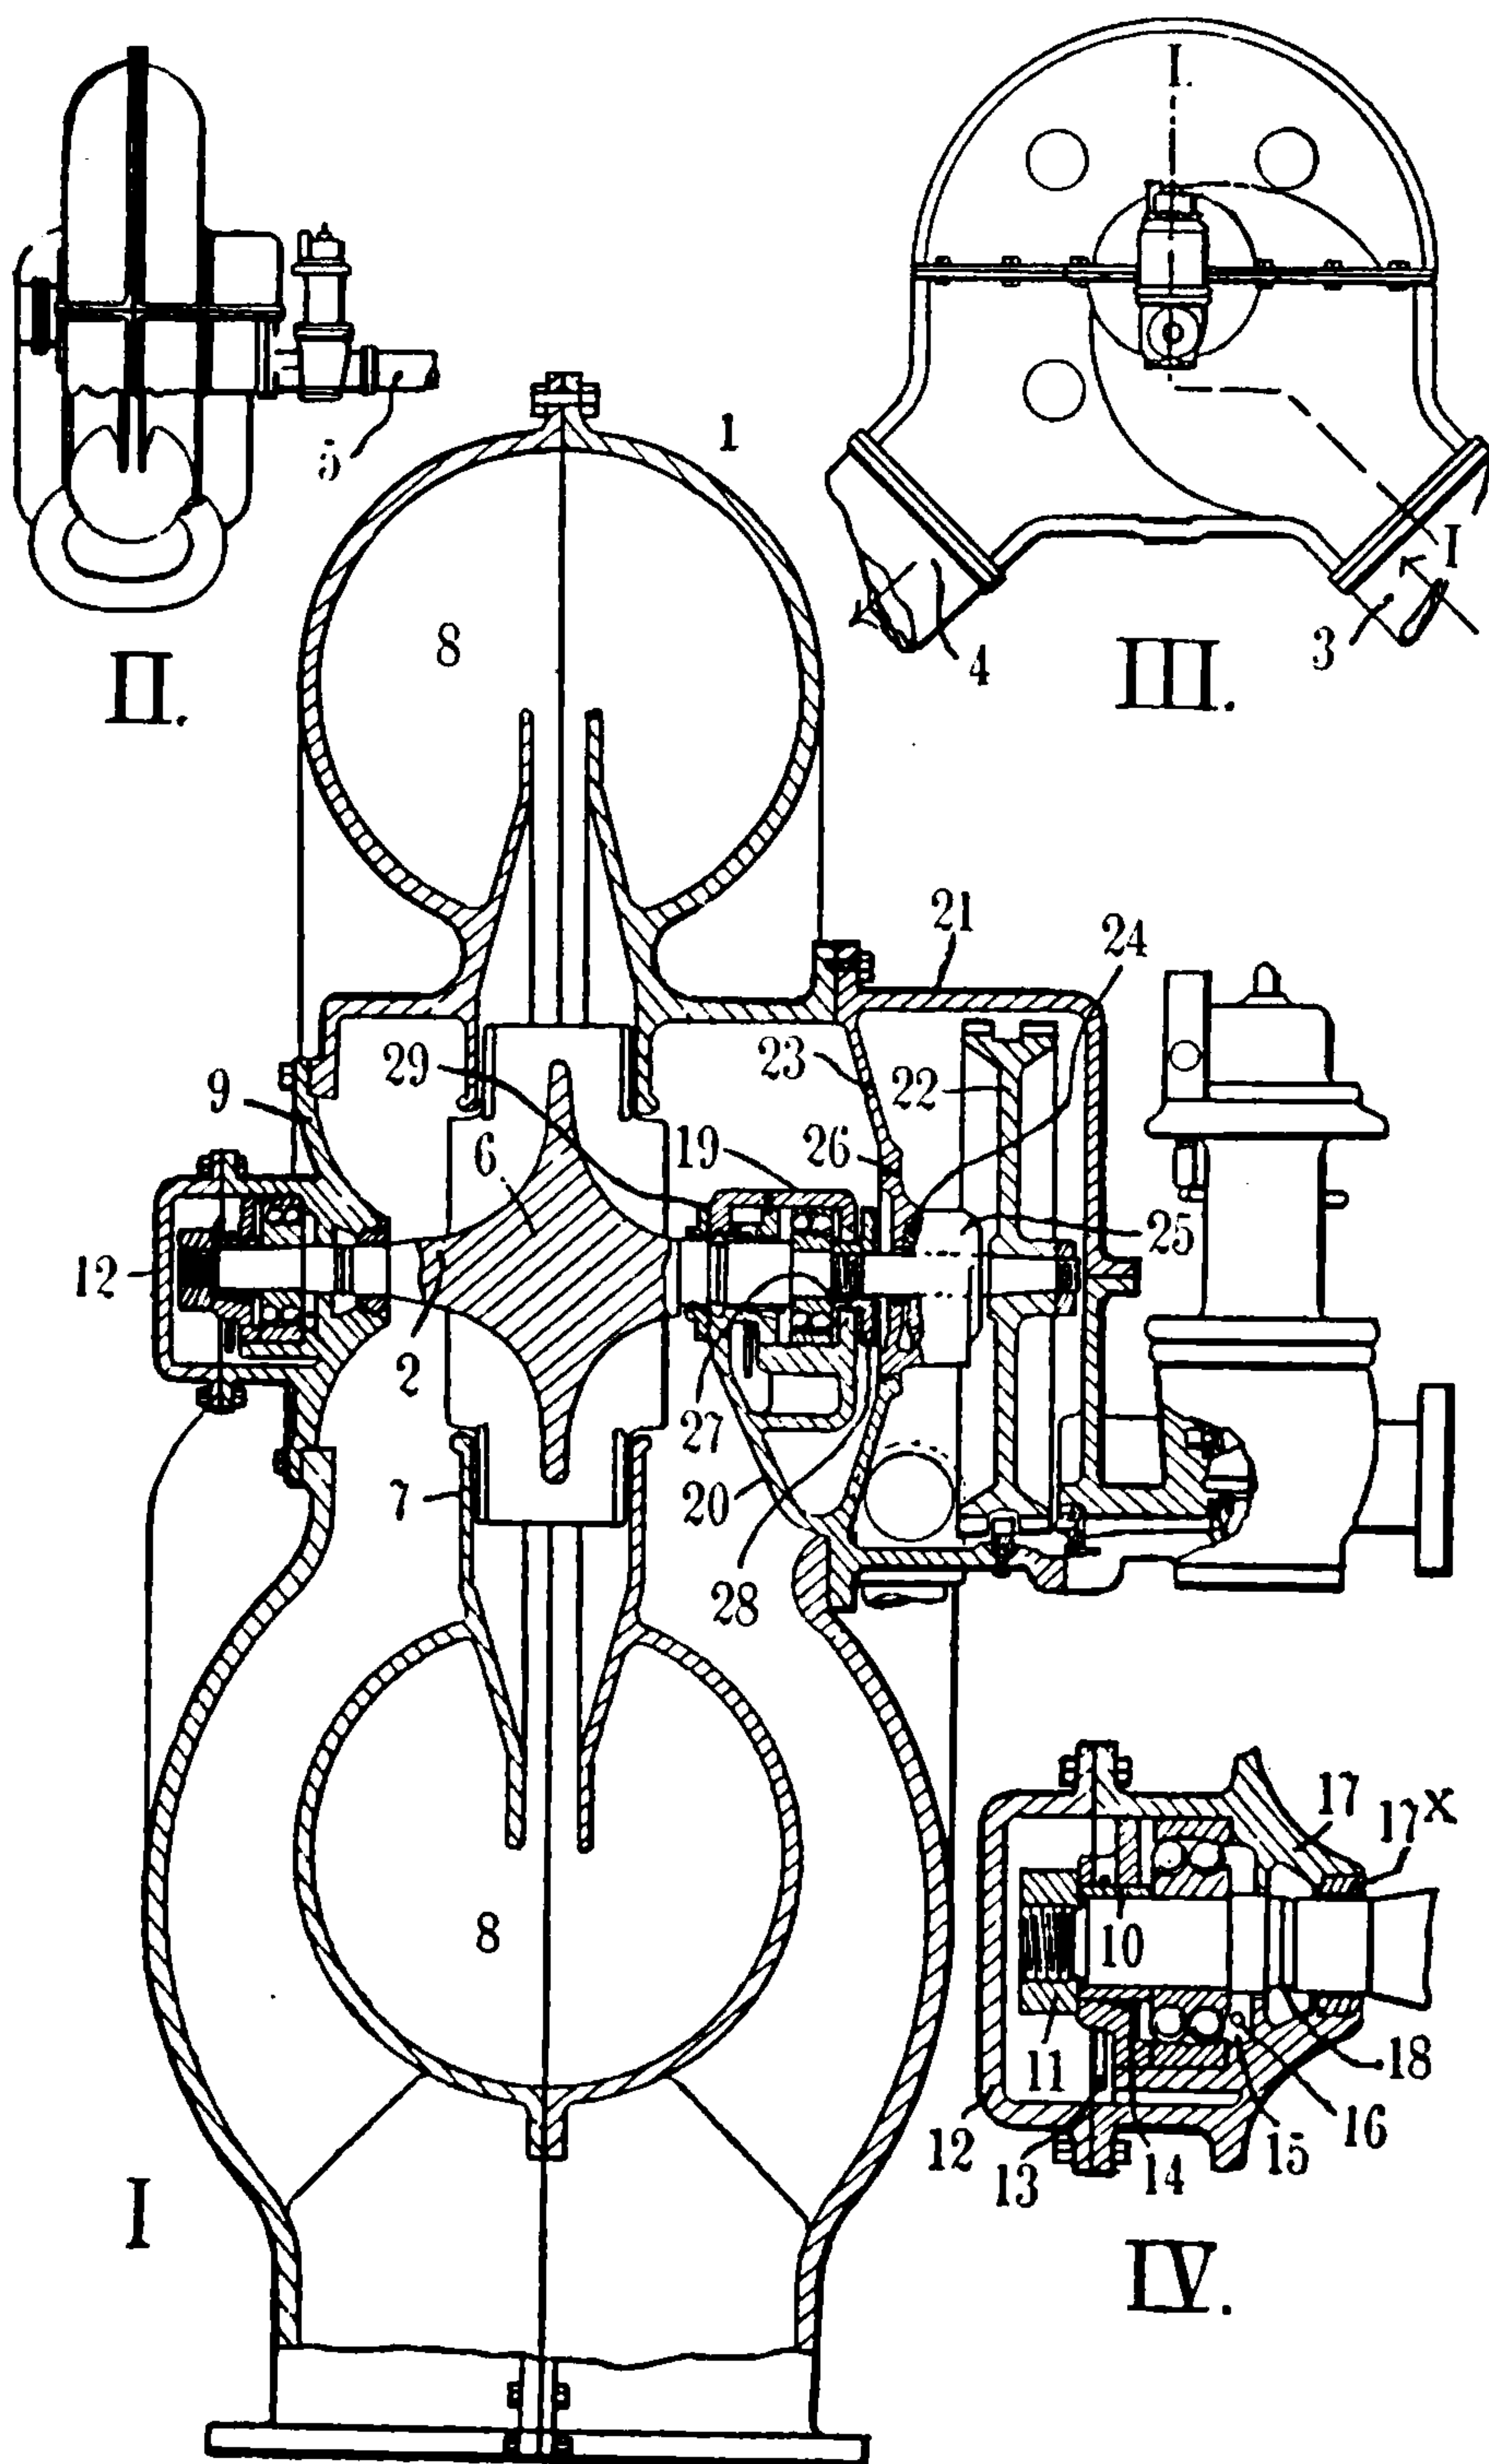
TURBO COMPRESSOR FOR GAS.
